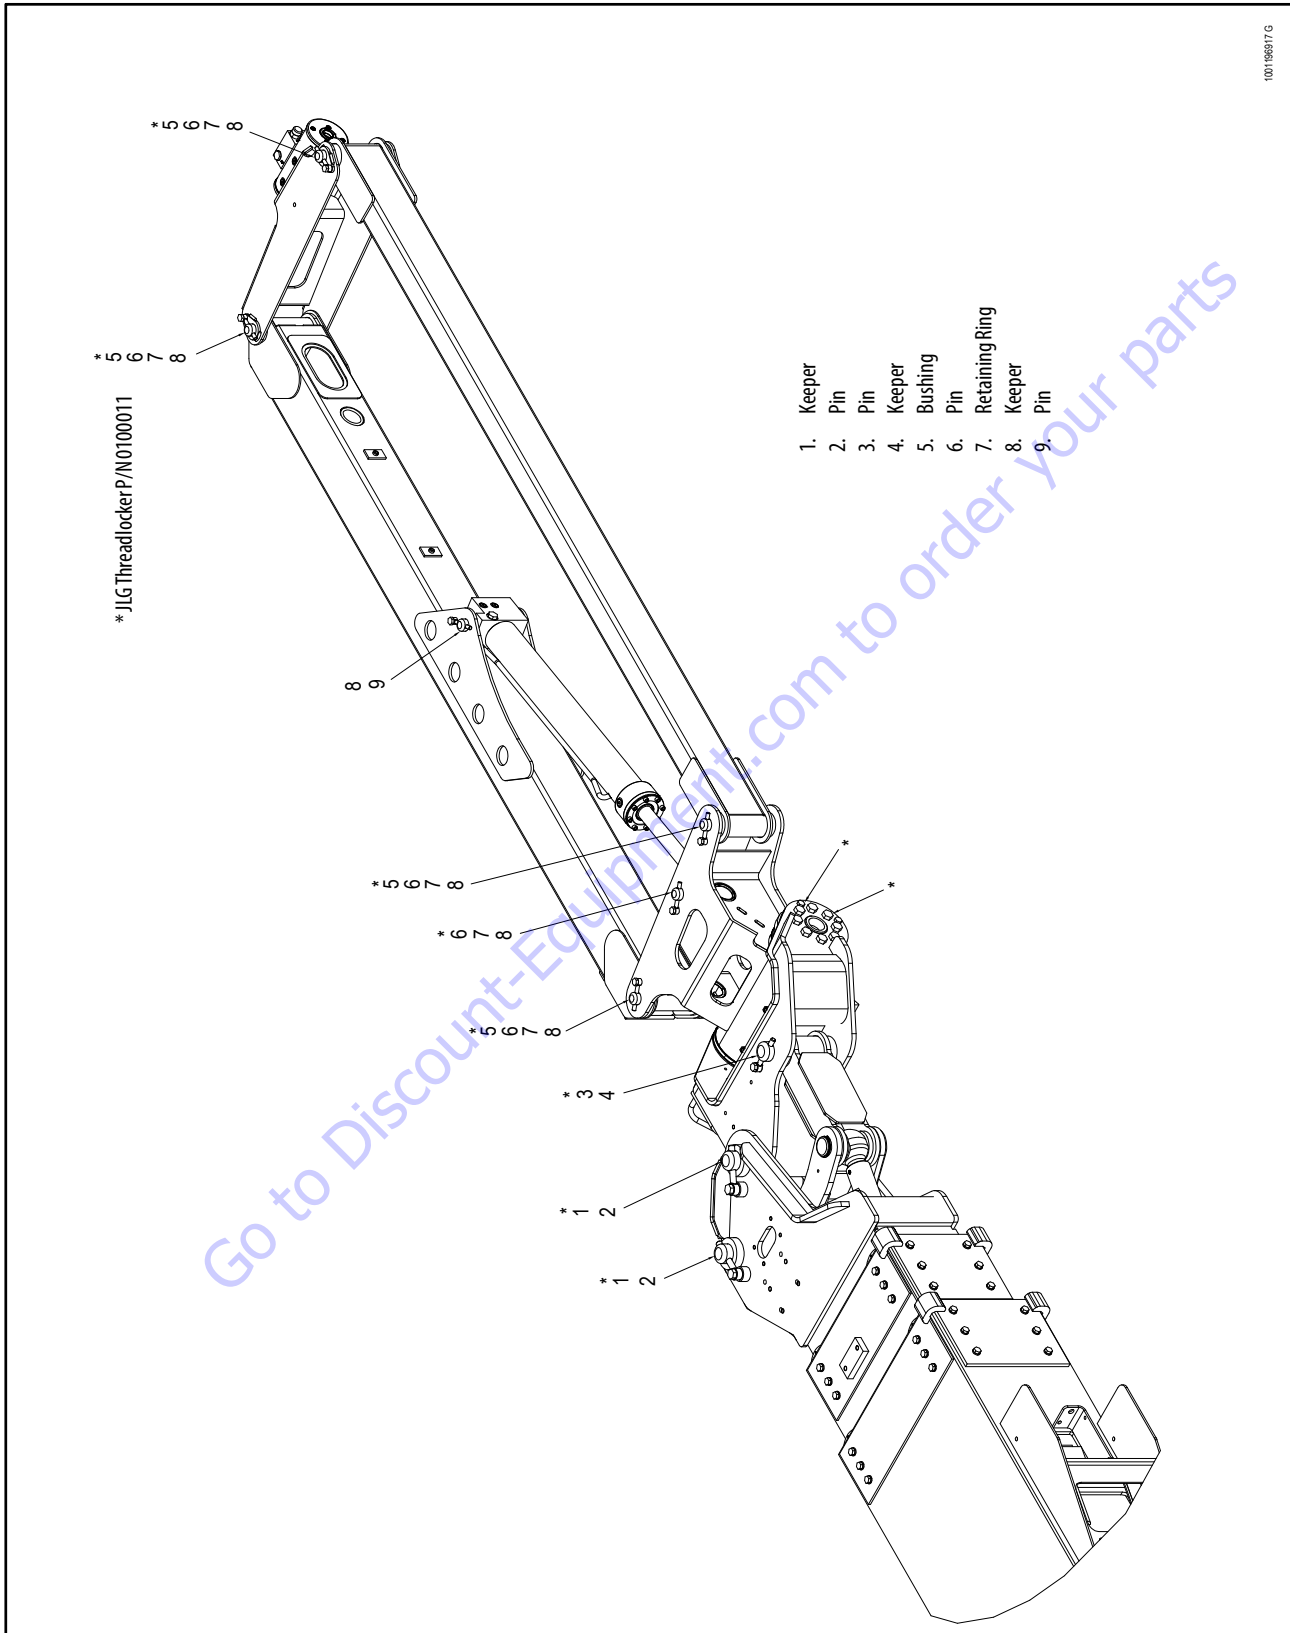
Main Boom Assembly - Sheet 6 of 7
